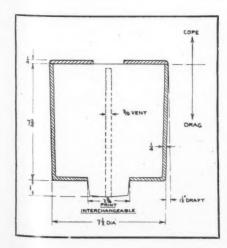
Test casting for evaluating ease of core knockout of different core mixtures.
